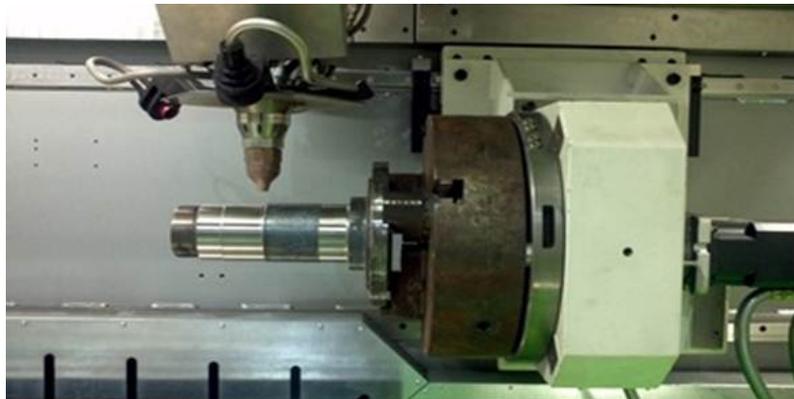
CTIS spindle loaded onto rotary axis of DDM machine
